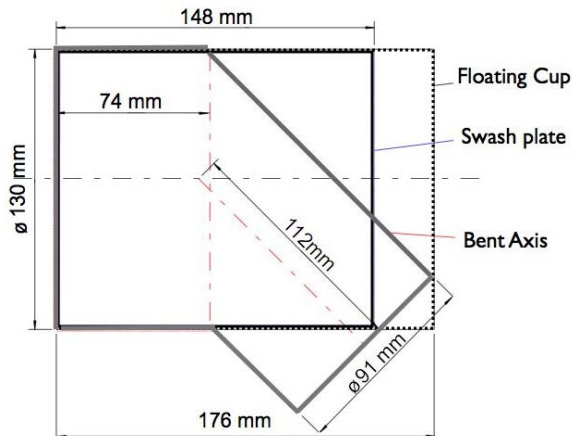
Comparison of main dimensions of rotating group of different piston machines
